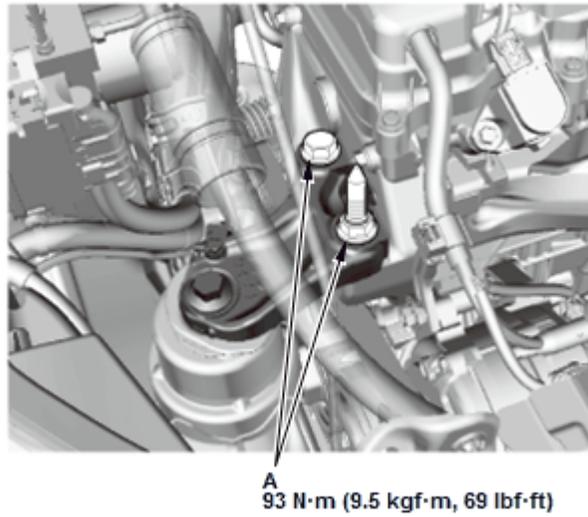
Side Engine Mount Mounting Bolt and Nut With Torque Specifications
